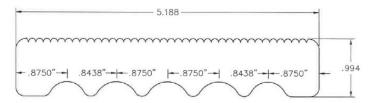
Rustic™ Deck and Stair Board - Solid Cross Section
